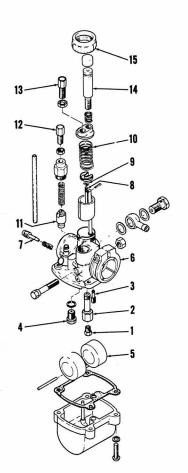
View of VM type carburetor used on G5 and G6 models.
